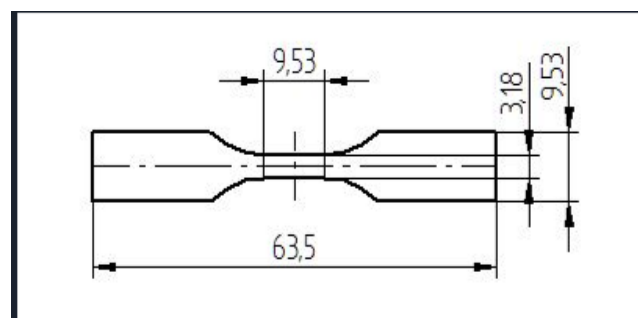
Tensile Test Specimen Dimensions as per ASTM standards
